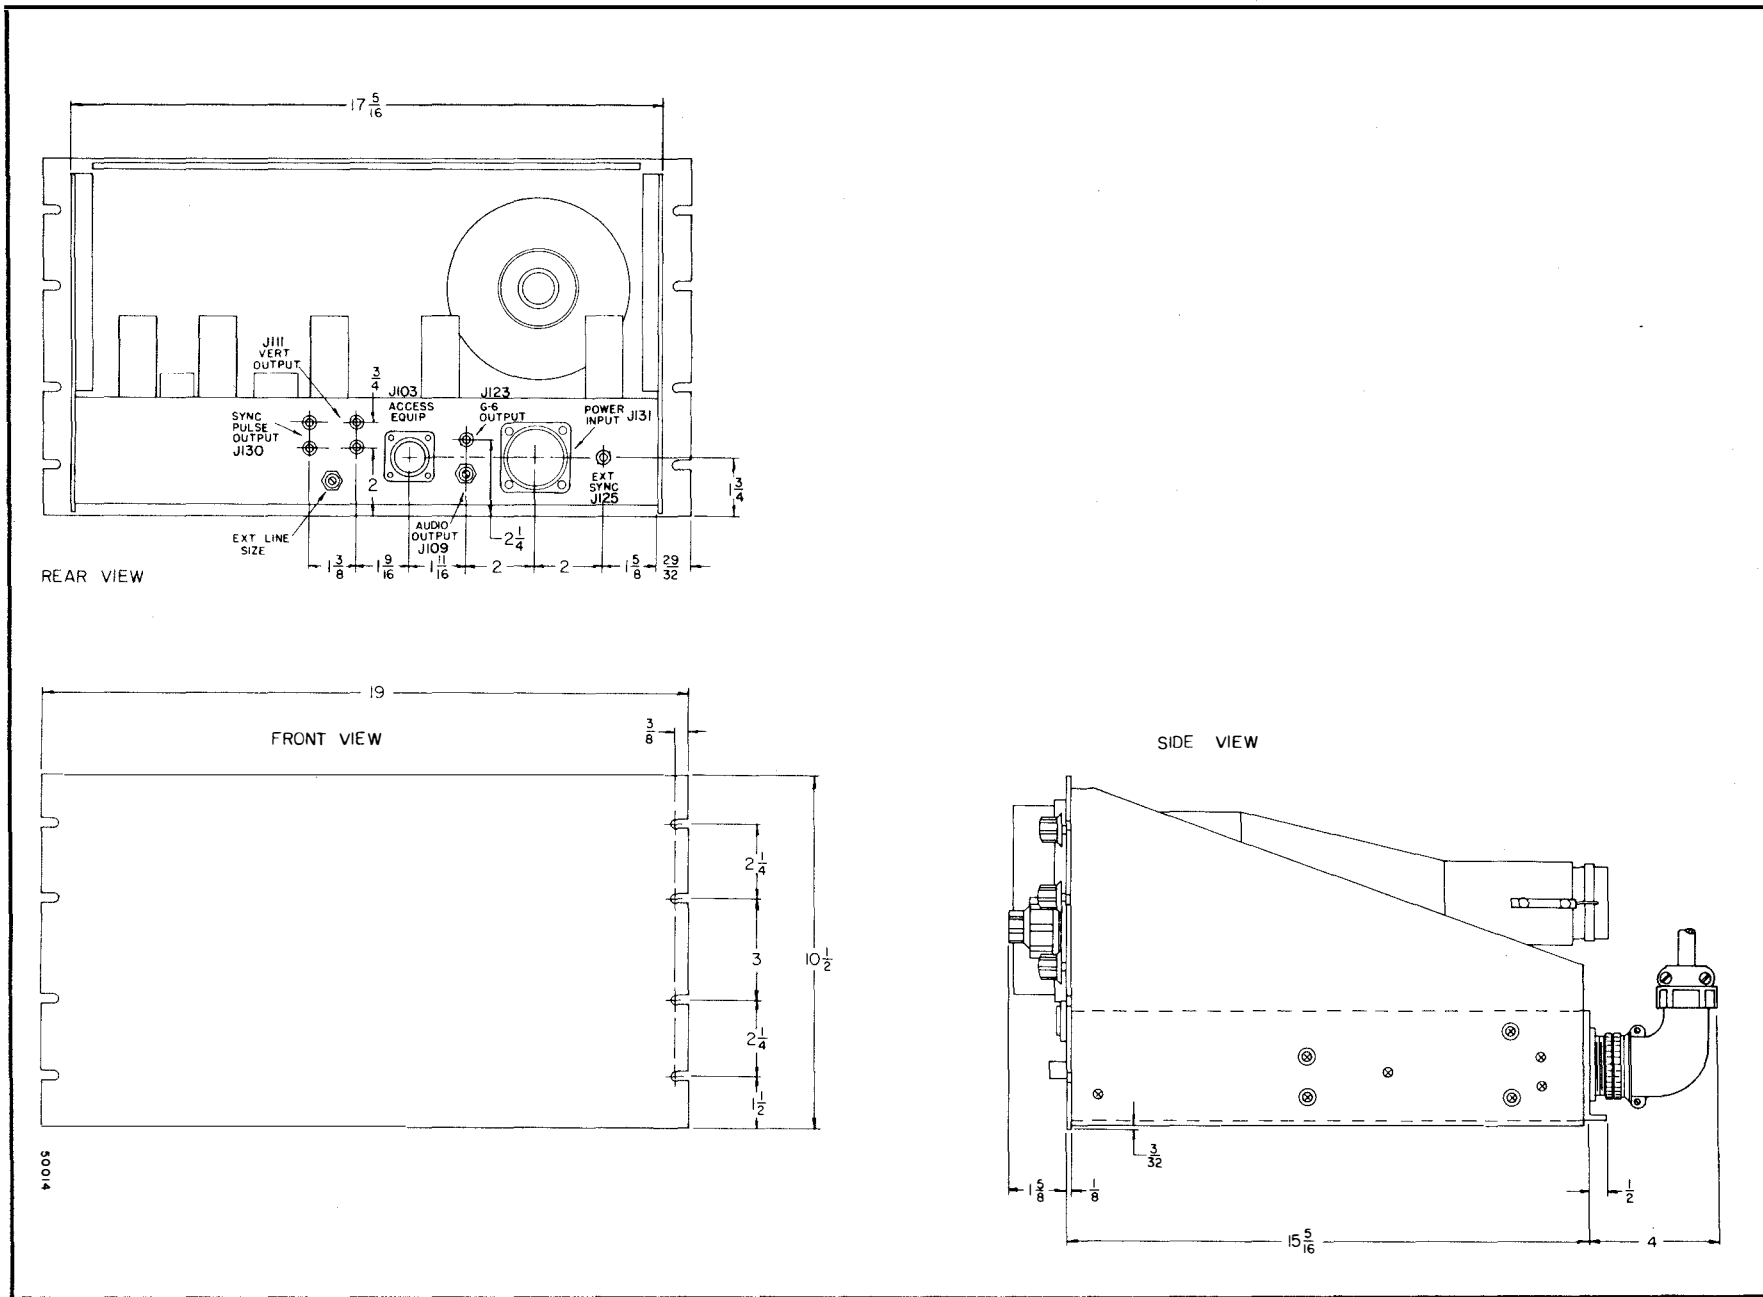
Outline Dimensional Drawing, Analyzer Section, Rack-Mounted Style, Series 1
